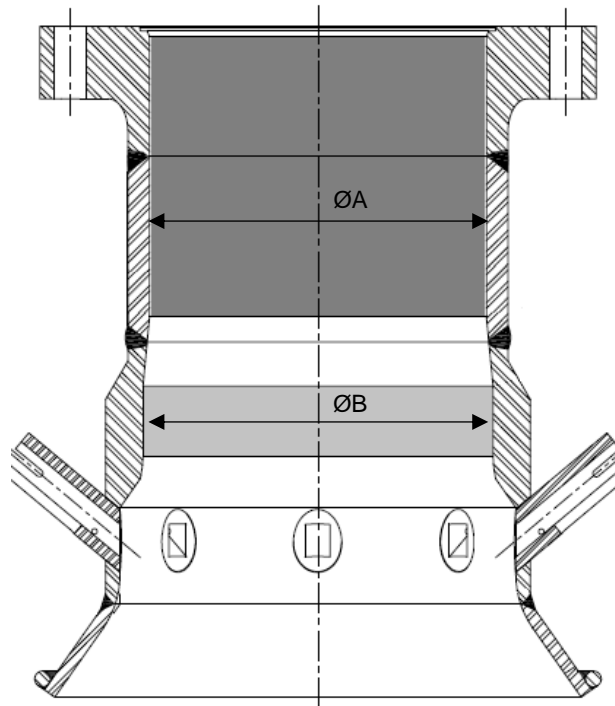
BSDI-SI's inner diameter to be inspected with the Dimensional Gauge
